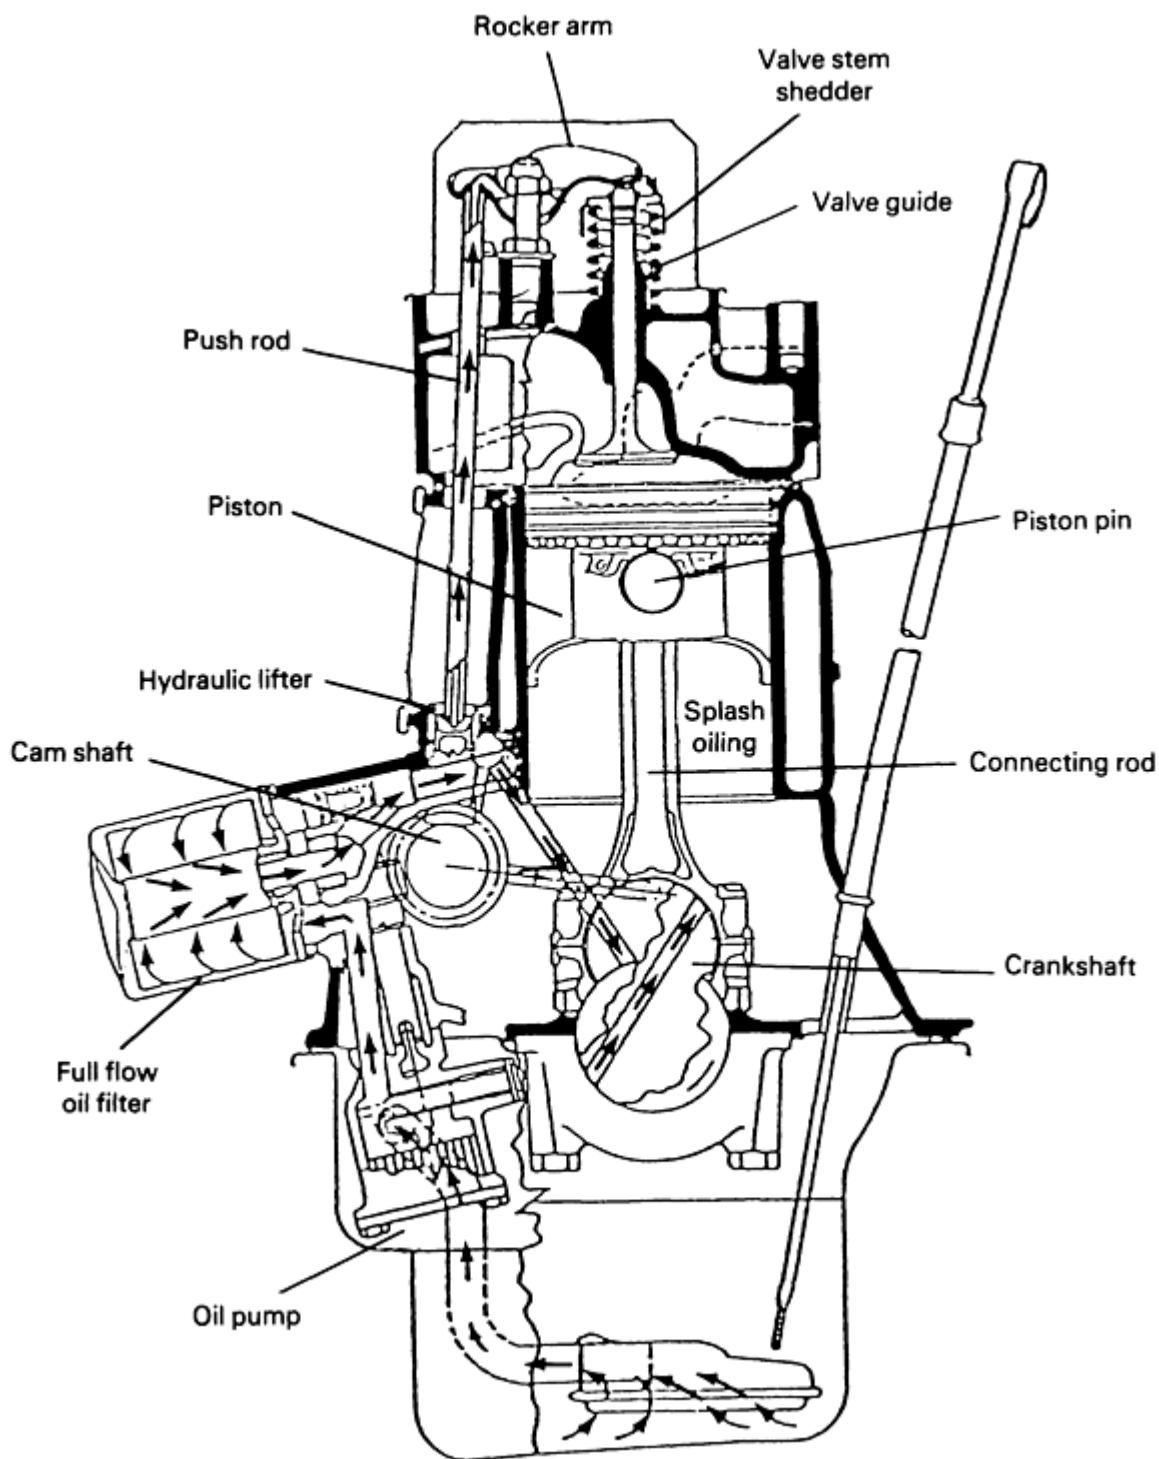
Lubrication mechanisms in cam-in-block overhead block valve engine. Source: Ref 4
